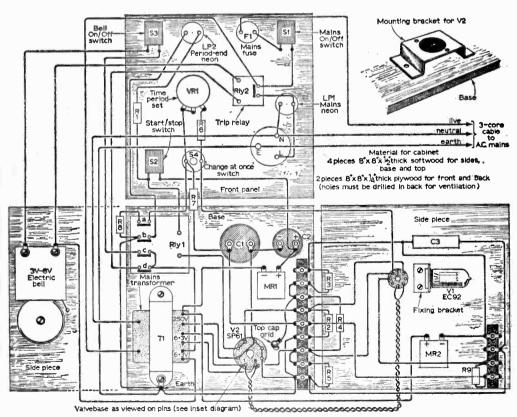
The complete wiring diagram. The side and front panels have been lain flat to make the wiring clear.
